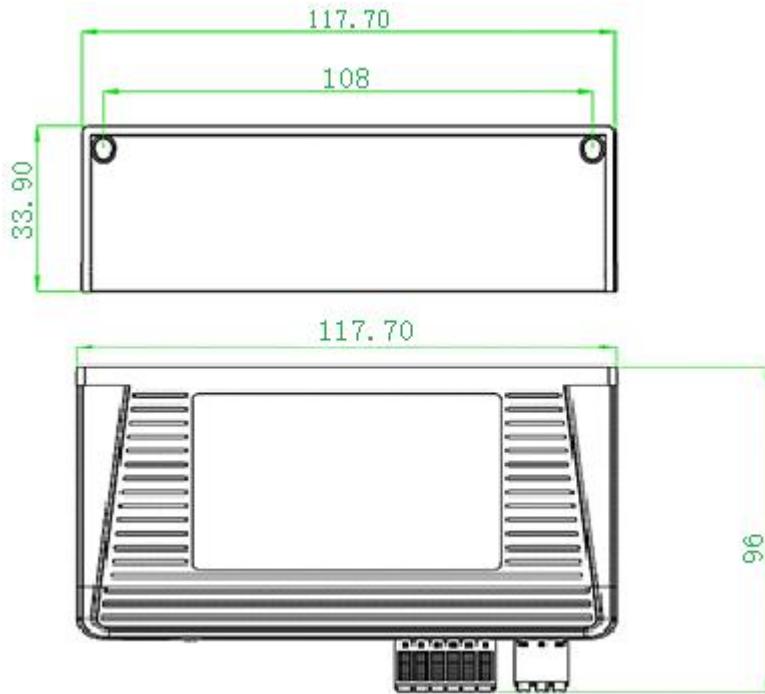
Machine dimension of JMC 2DM522-R/RC Drive (unit: mm)
